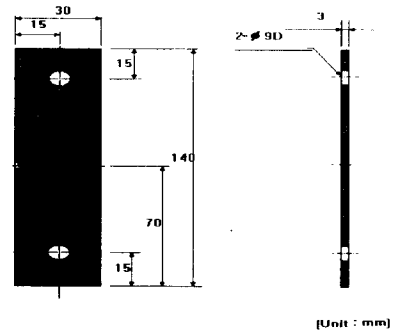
Single edge notched specimen for threshold fatigue crack propagation test
